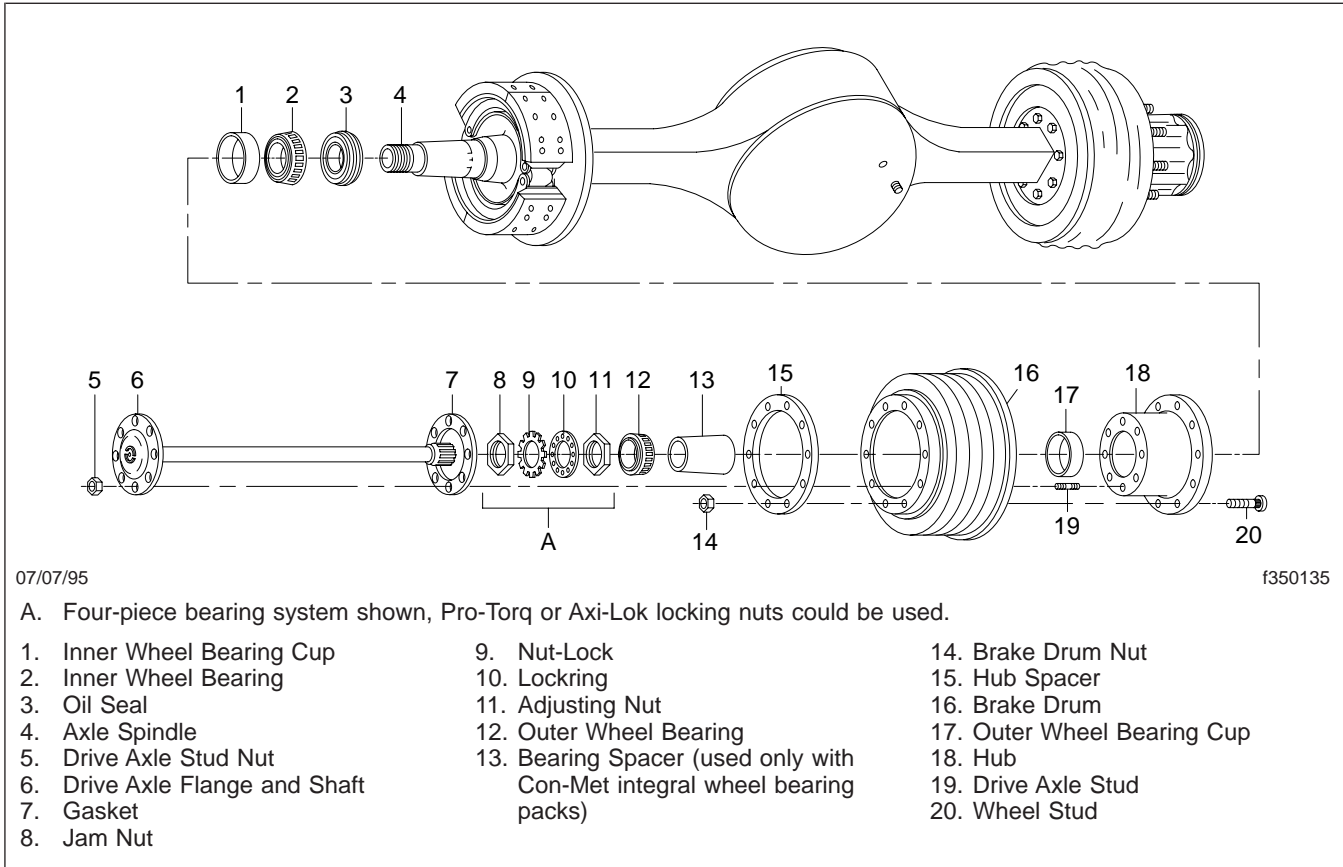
, Typical Drive Axle and Hub Assembly (exploded view)
